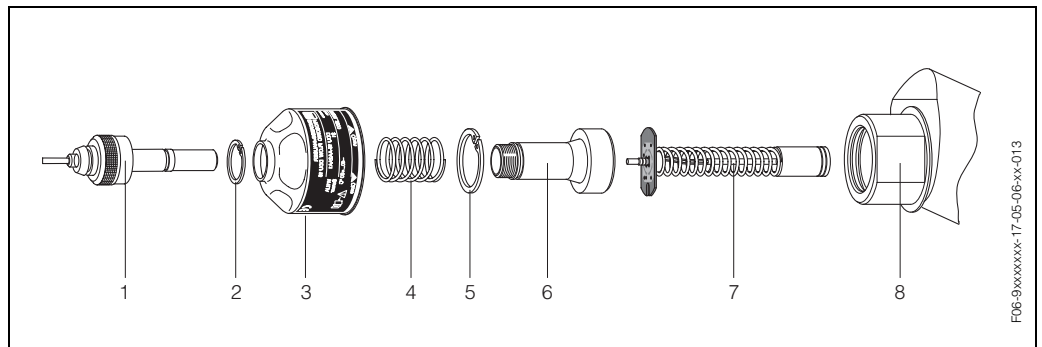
Flowrate measuring sensor W “Insertion”: installing/removing
